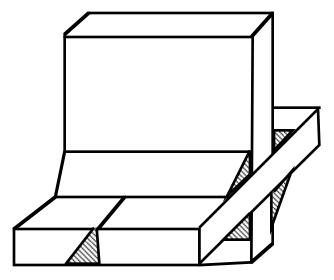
A general weld is a mixture of fillet and butt welds.
